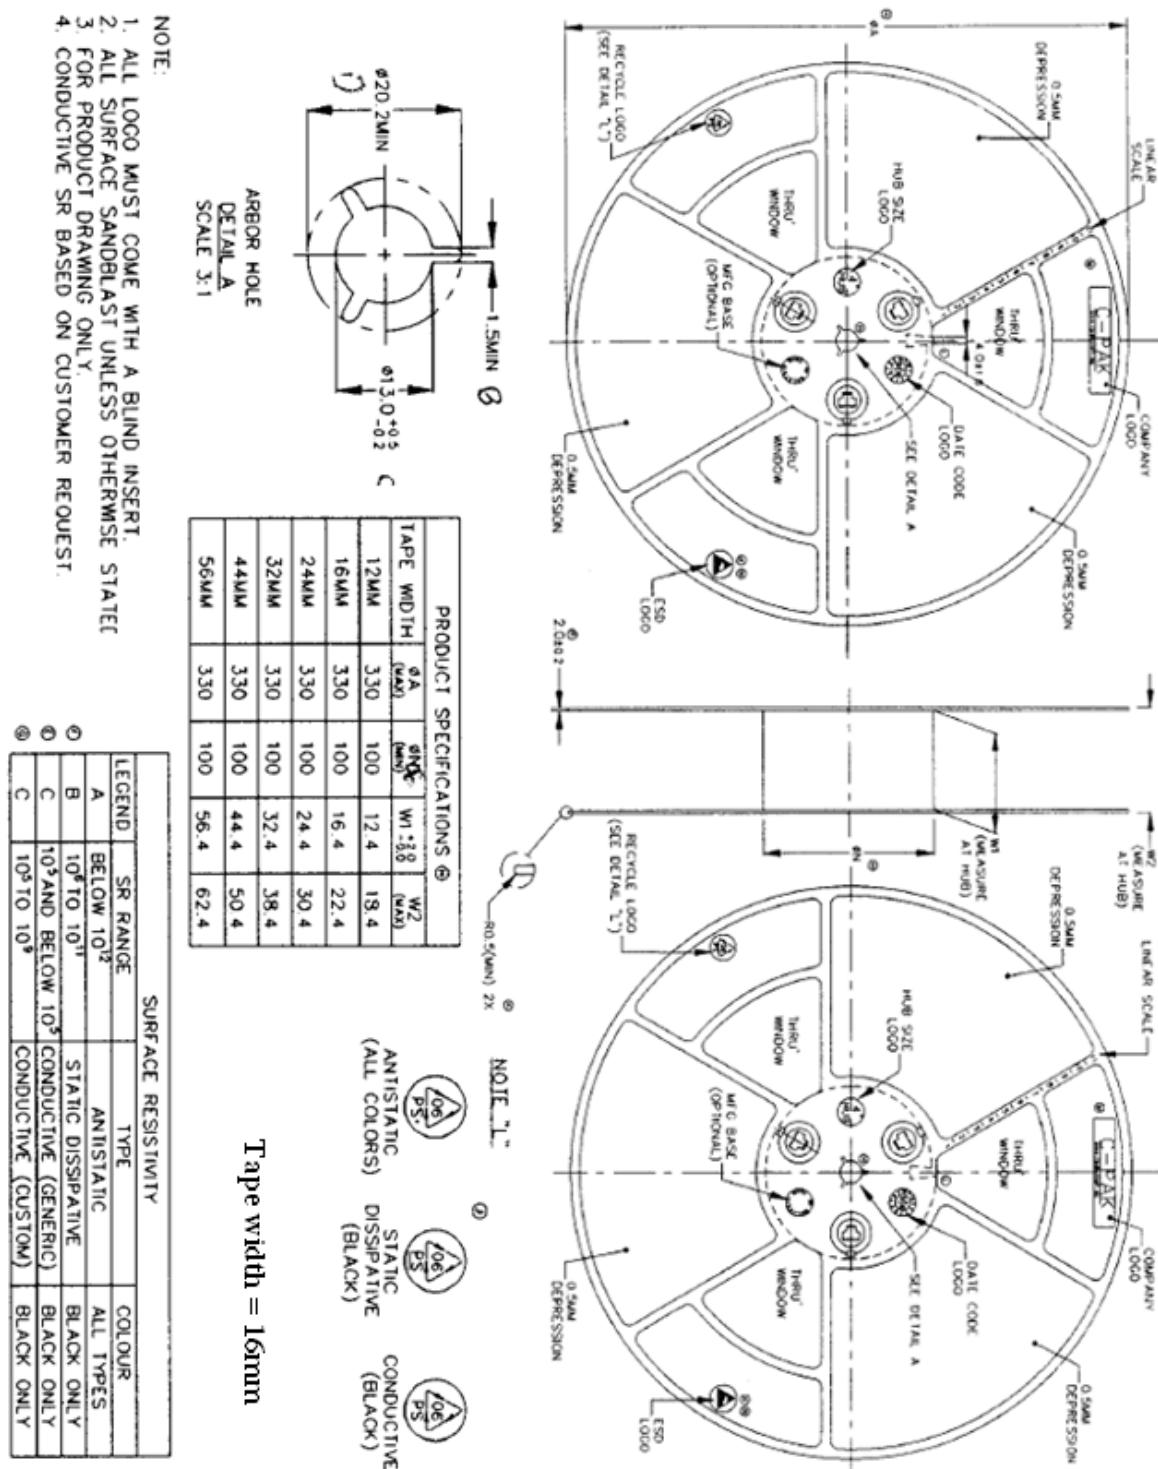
FT232HL and FT232HQ Reel Dimensions
